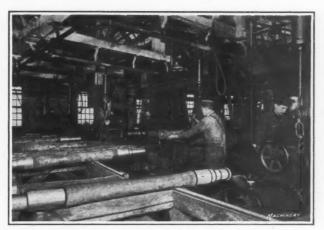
Car axles are too heavy to be handled by one man. This illustration shows a view in the Griffin Wheel Co.'s plant in Chicago, where each axle lathe is equipped with an air cylinder hoist for setting up work and removing it. Turned axles are rolled on rails to the hydraulic wheel press
